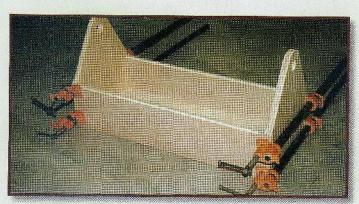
Clamps help to snug up the joints until the glue is thoroughly cured.
